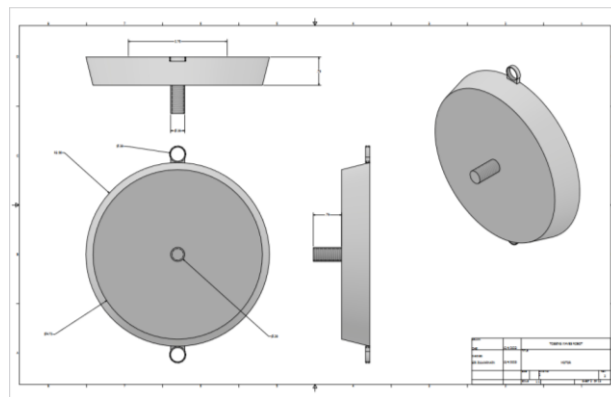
Motor - The motor is used to rotate the wheel at high speed so that it can shoot the ring.
